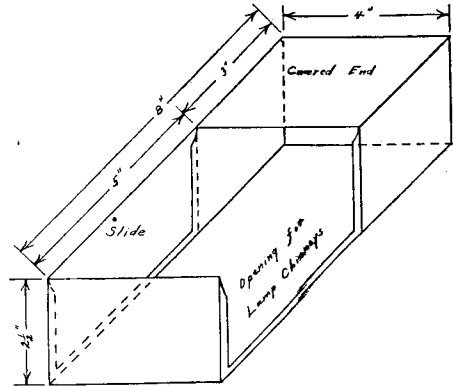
Design for construction of guinea pig holder. The slide is removable, and may be inserted on left or right.
